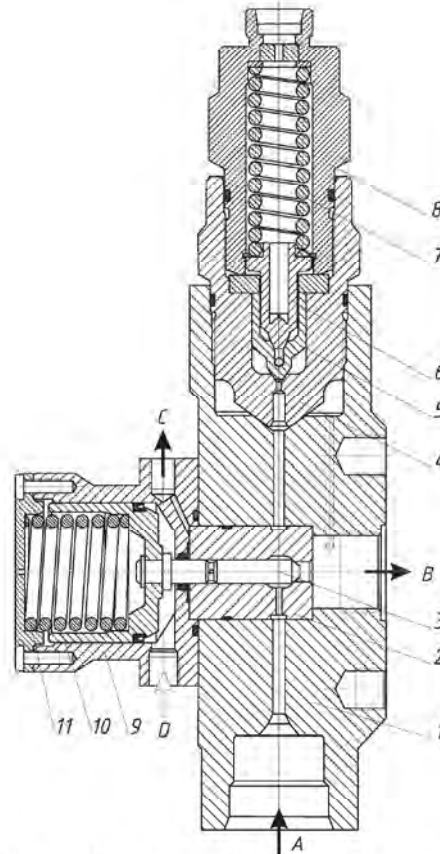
Bleeding and emergency pressure relief valve and maximum pressure limitation valve: 1 – valve block housing; 2 – bleeding valve housing; 3 – bleed valve stem with shut-off cone; 4 – housing of the maximum pressure limiting valve; 5 – plug-in valve-limiter seat; 6 – shut-off cone of the limiting valve; 7 – loading spring; 8 – threaded plug; 9 – pneumatic cylinder for pumping valve drive; 10 – piston of the pumping valve drive; 11 – loading spring; A – fuel supply from the accumulator; B – drain line; C – collection of leaks; D – compressed air from the control system (adapted from [60, 61])
